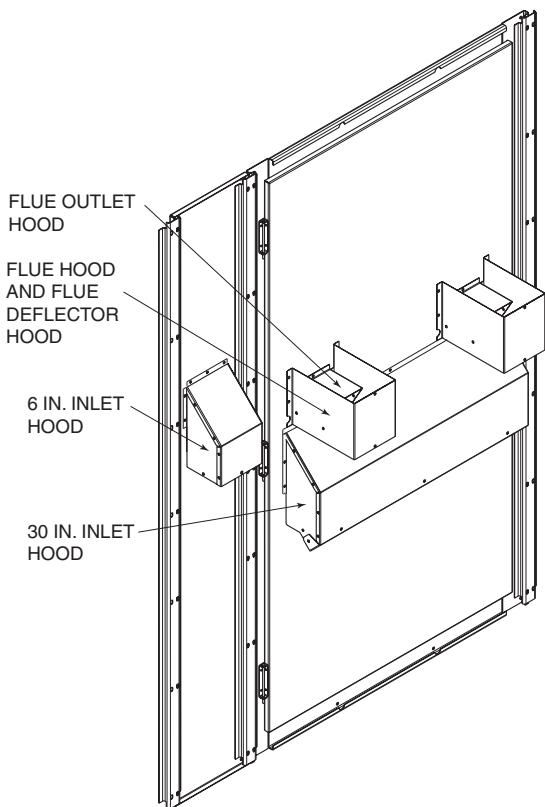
Flue/Inlet Hood Locations, 030-050 Units
